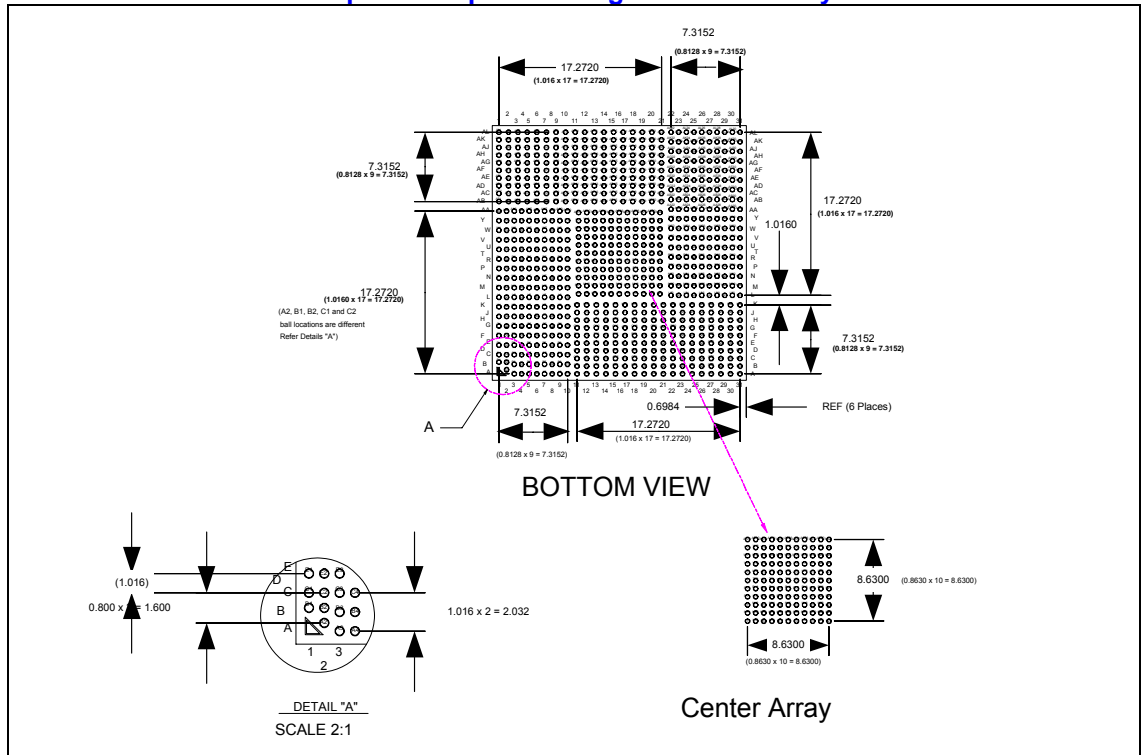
Mobile Intel 915GMS Express Chipset Package Ball Grid Array
